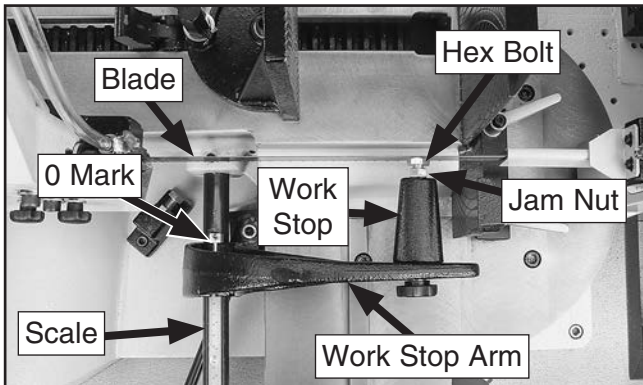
Top view of work stop rod aligned with "0" on scale and hex bolt touching blade.
